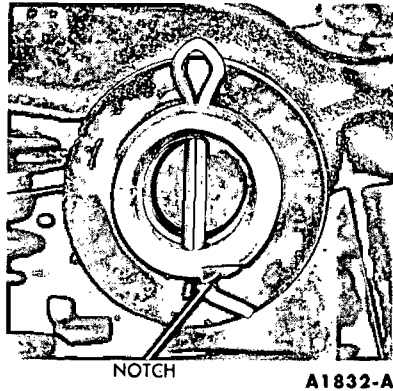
Typical Installation Identification Mark—Rocker Arm Shaft Assembly
